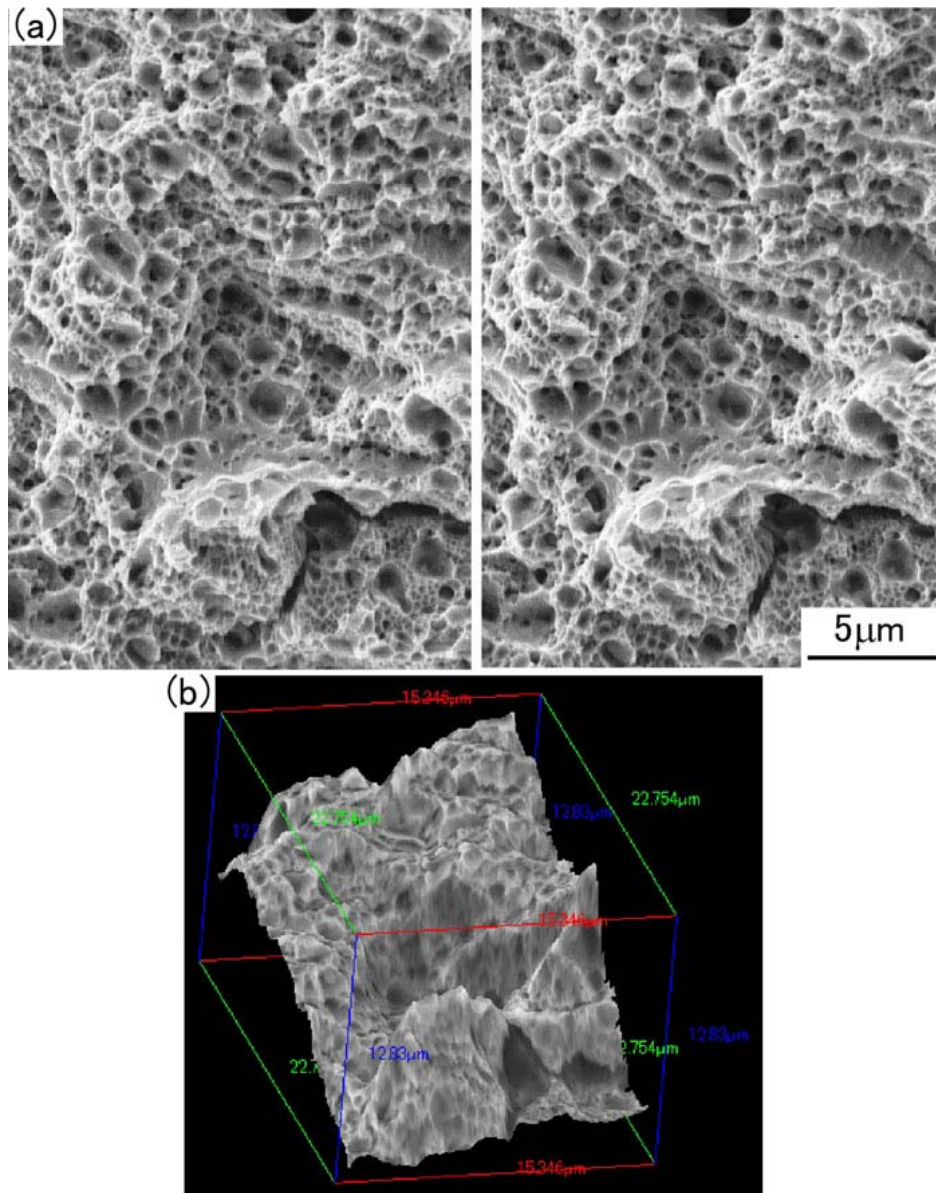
Fracture surface of fractured SUS304L MM36ks-HIP specimen.
